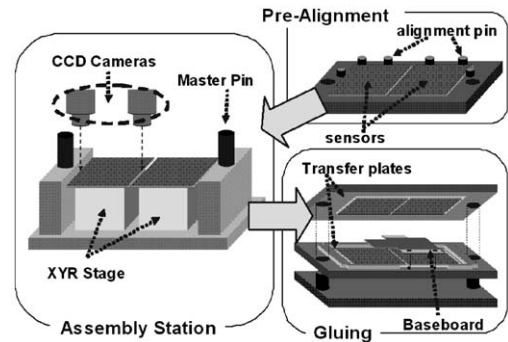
Illustration of the sensors alignment steps and jigs. The details of this system are given in Ref. [4].
